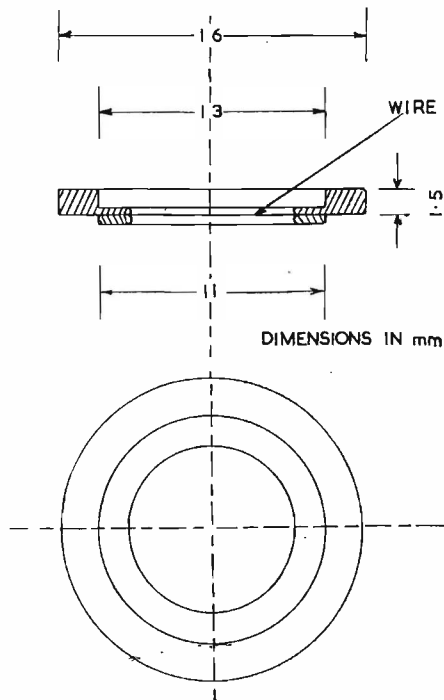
Cross-section and plan of ring frame, showing the thin welding flange and the thicker strengthening section
